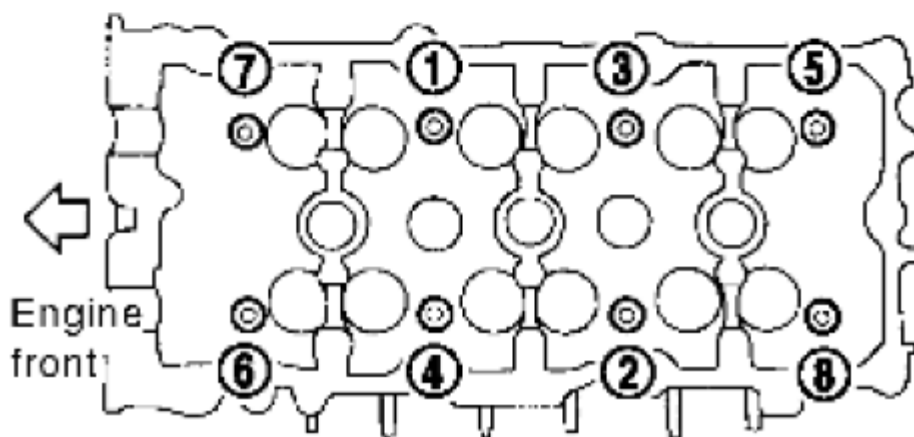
Identifying Cylinder Head Bolts Remove Sequence
